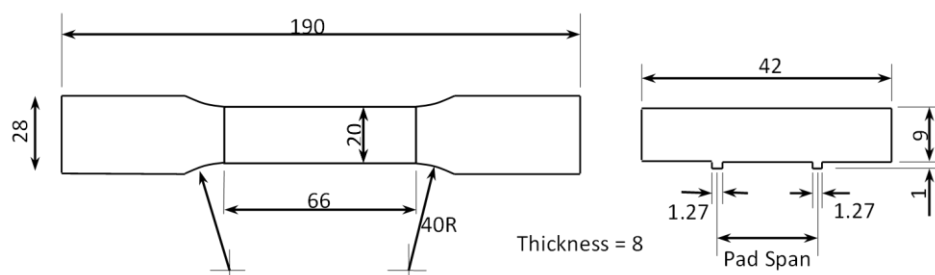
Specimen and fretting pad (all dimensions in mm)
